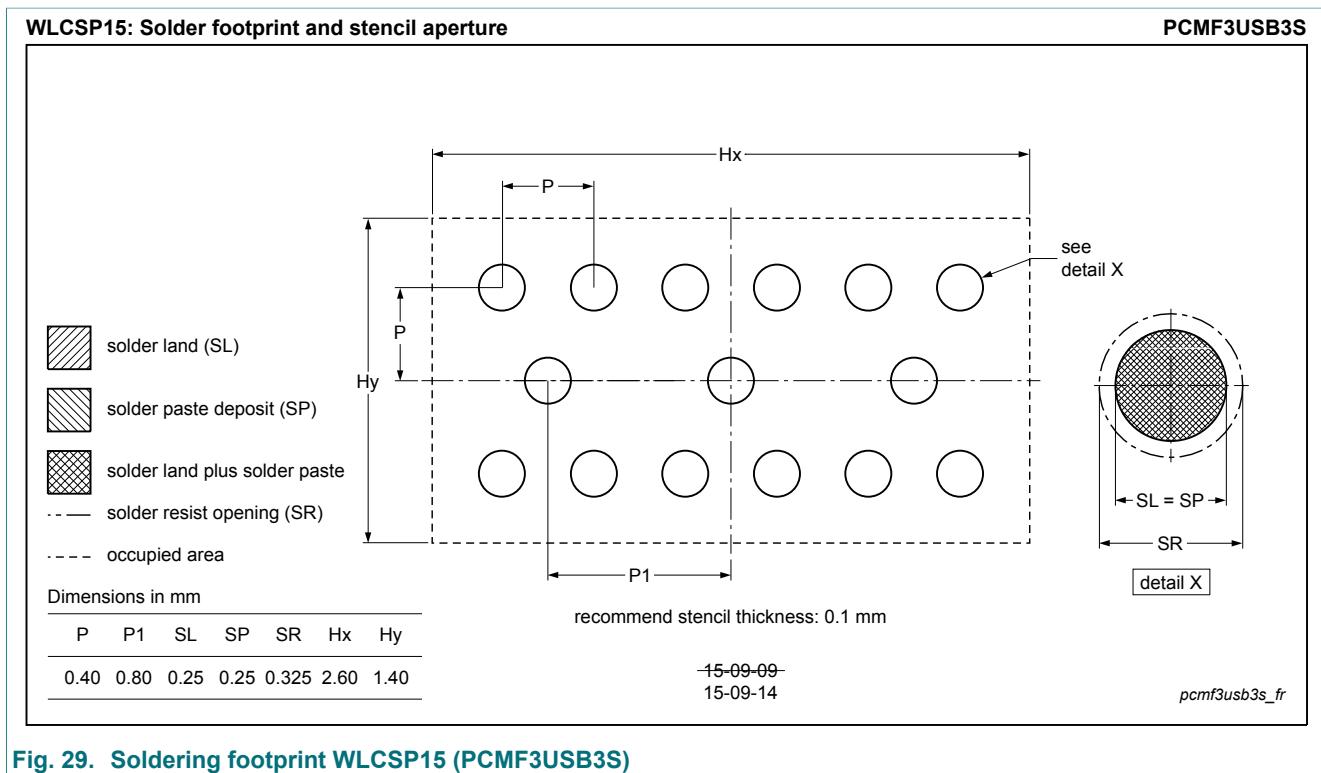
Soldering footprint WLCSP15 (PCMF3USB3S)
